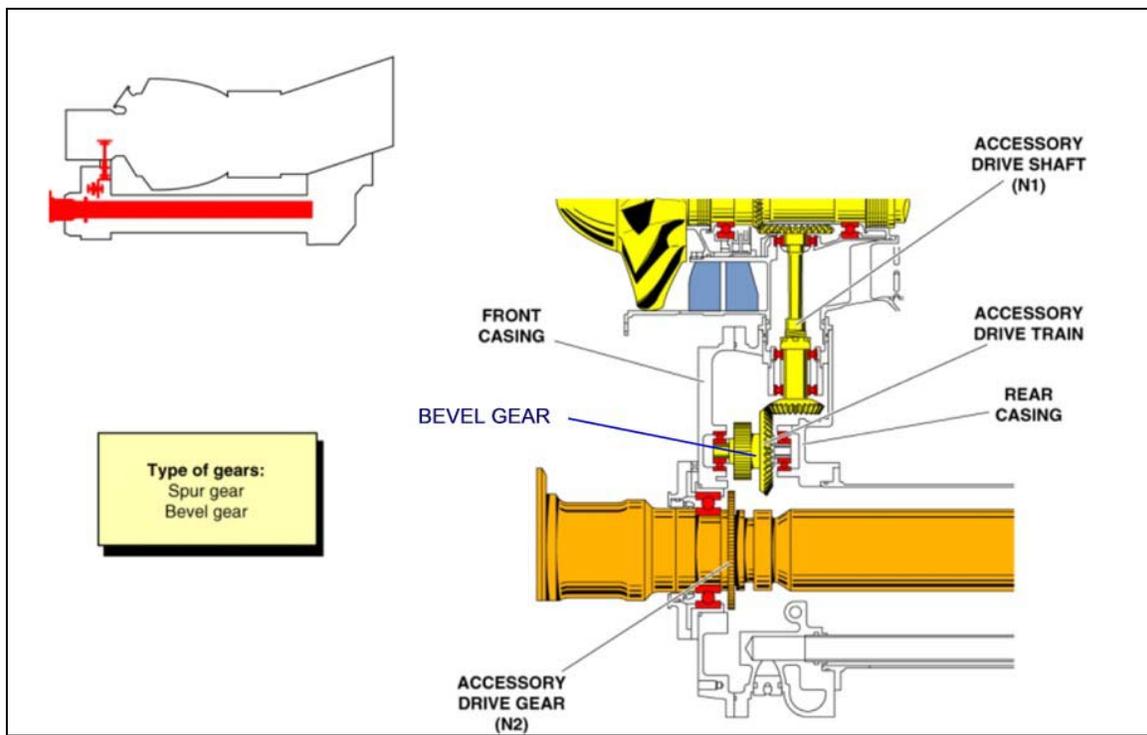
Schematic of Arriel 1D accessory drive gearing
